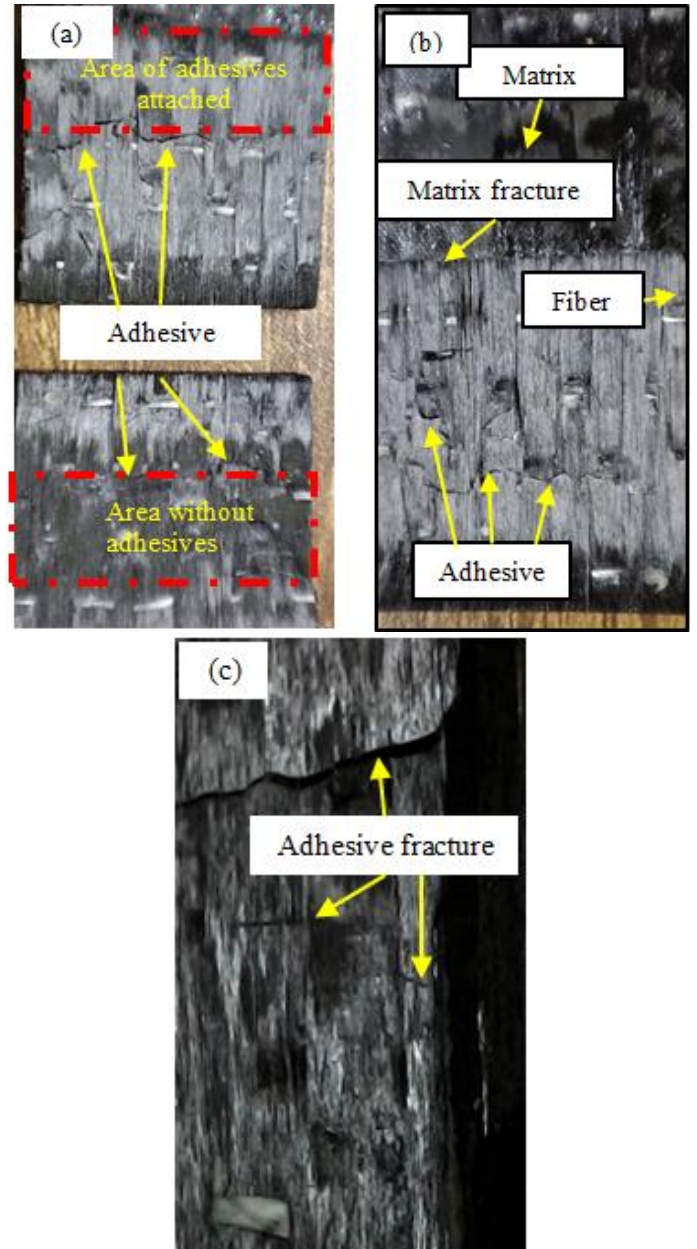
Fracture images of the single lap joint type: (a) both sides of the joint fracture, (b) the fracture and non-fracture areas of the joint, (c) magnified image of the joint fracture.
